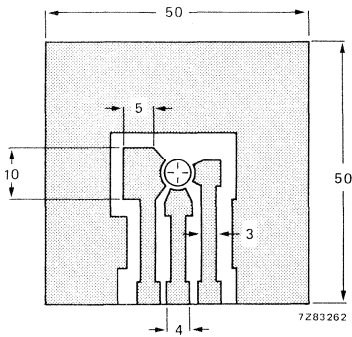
Requirements for fibre-glass print. (Dimensions in mm.)
